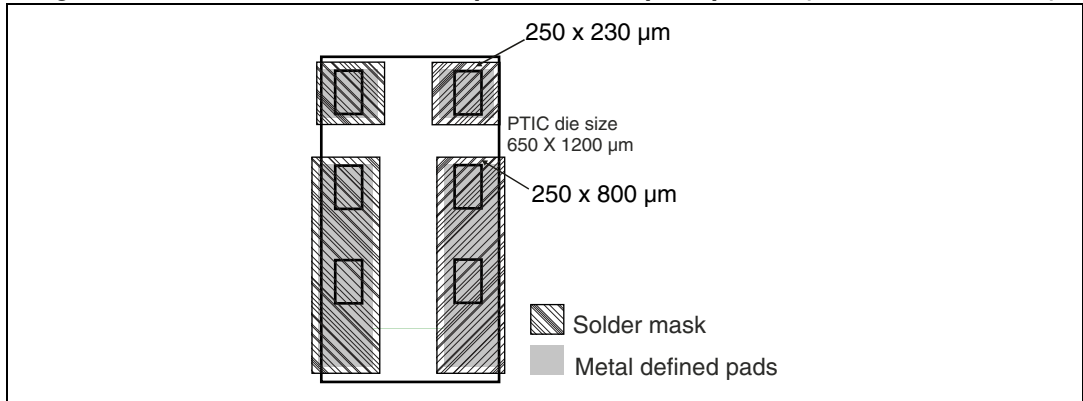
Flip Chip dimensions (size for 5p6, 6p8, 8p2)
